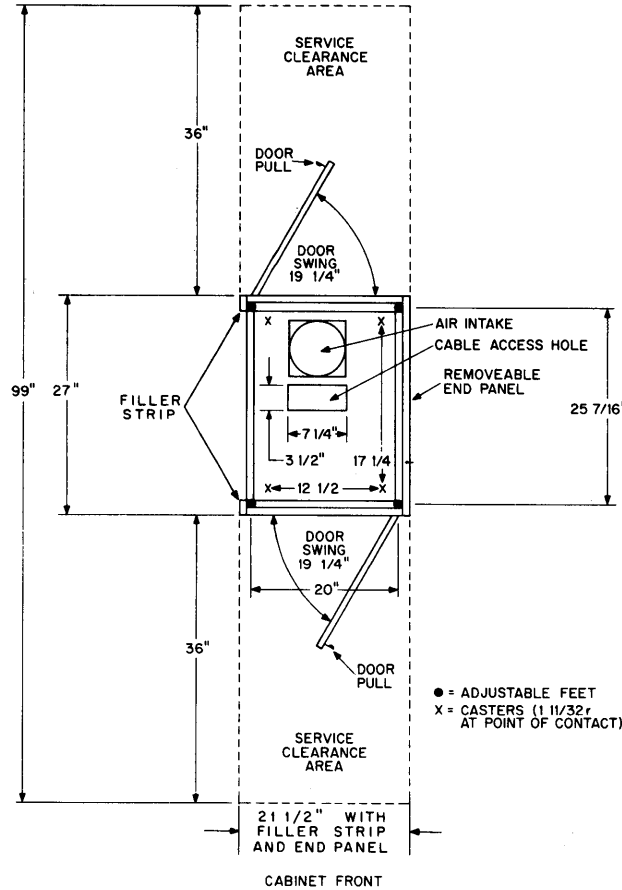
TD10A/B Cabinet Clearance Dimensions
